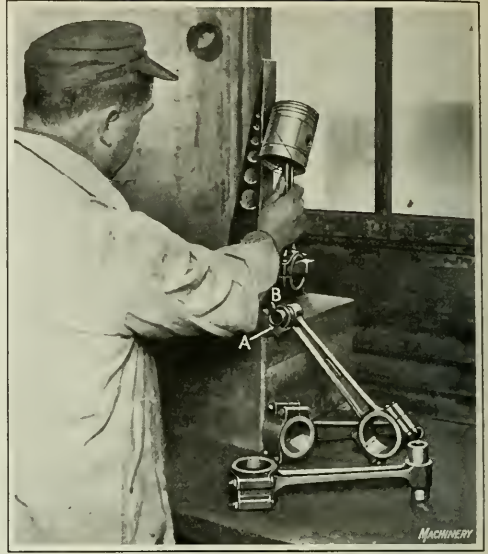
Testing the Alignment of the Assembled Piston and Connecting-rod
